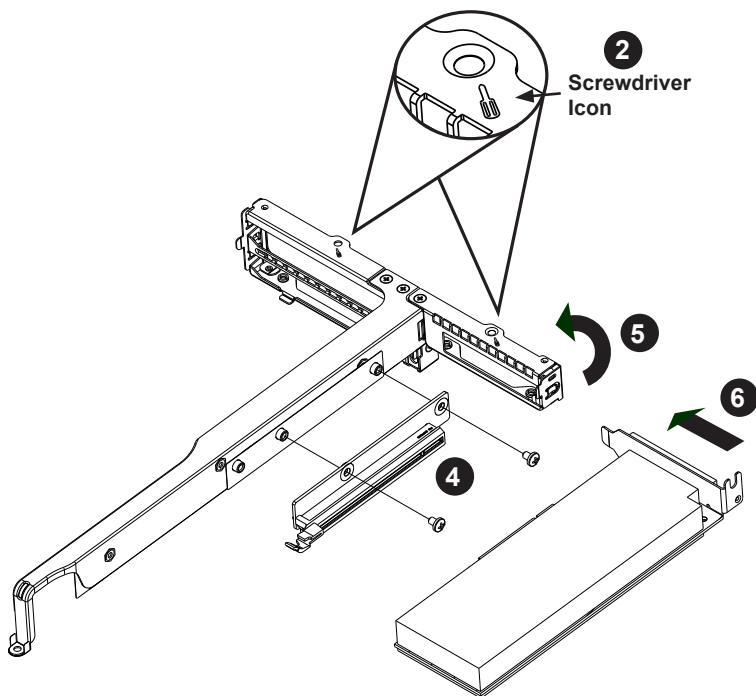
Installing the Riser and Expansion Cards in the Bracket
